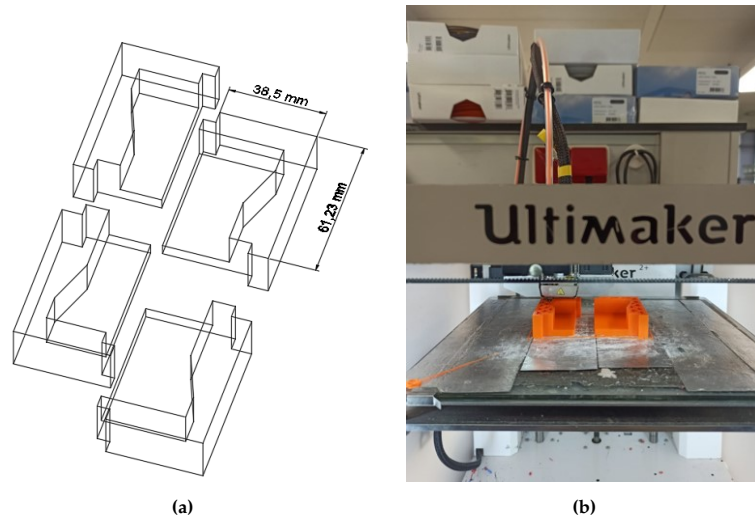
Moulds: (a) design in Autocad & (b) 3D printing in Ultimaker
